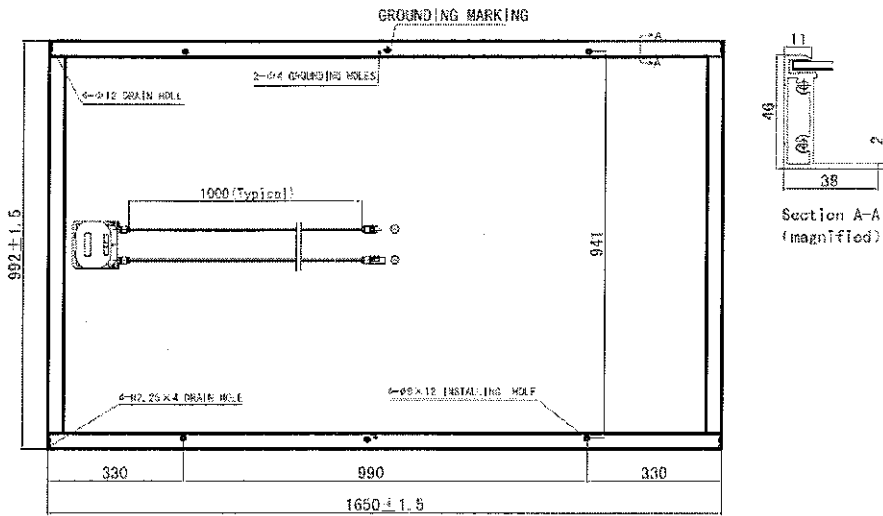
Back View of 6*9-156x156mm 54cell SPV Module
